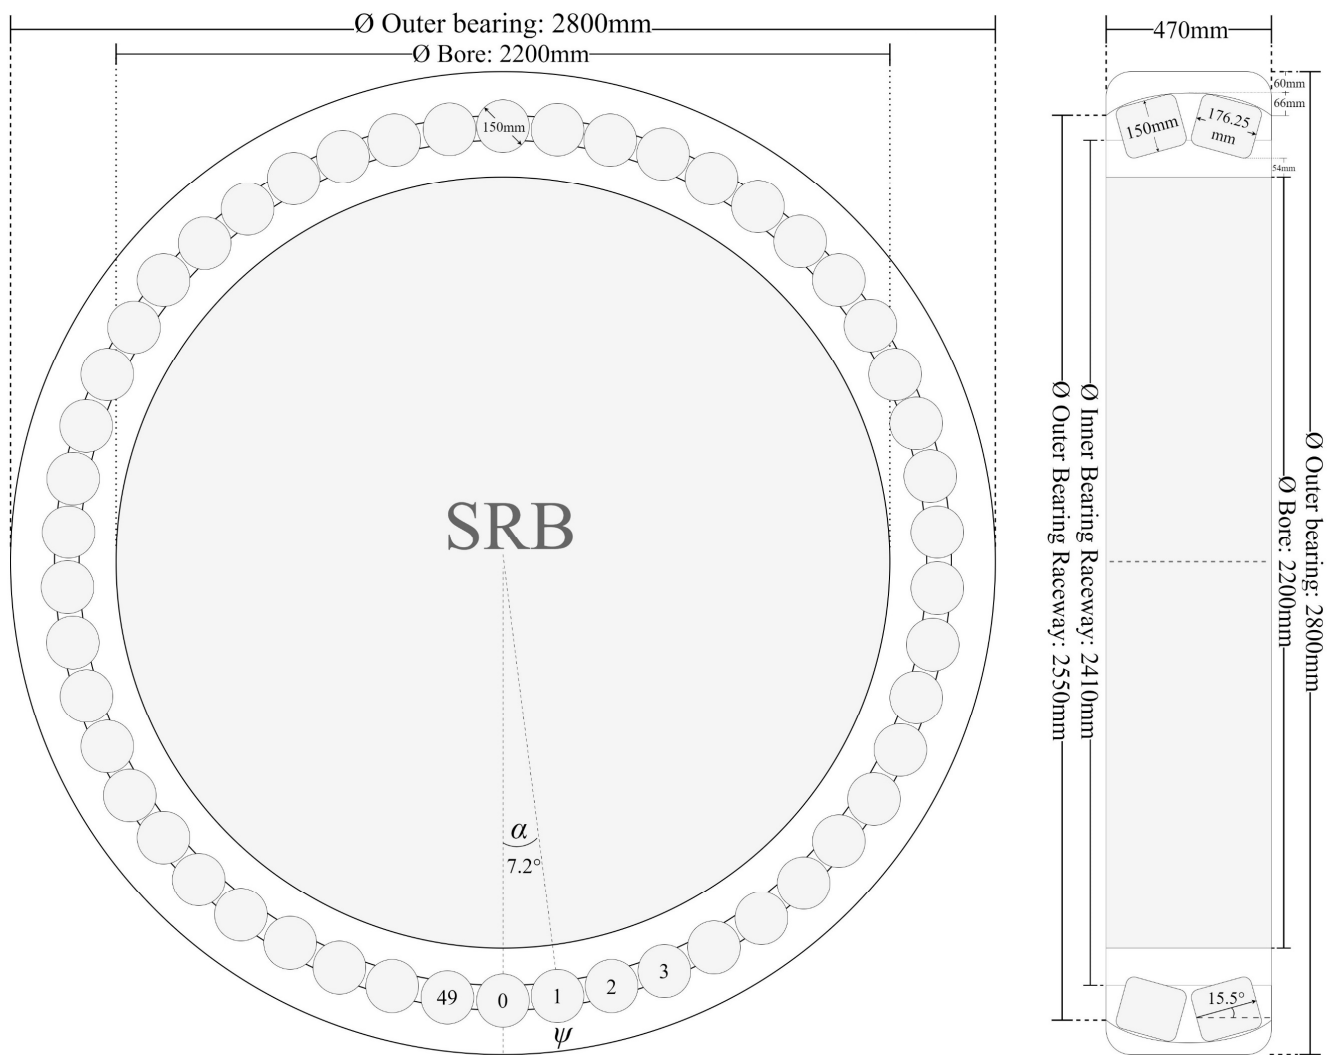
Technical drawing of Bearing 2—spherical roller bearing.
